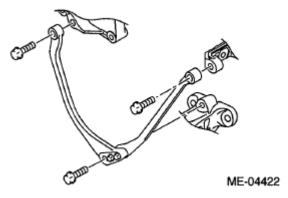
Locating Bolt And Engine Mounting Nuts Courtesy of SUBARU OF AMERICA, INC.
